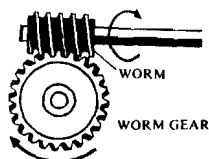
The worm gearing has a short revolving screw (the worm) whose teeth move into the special teeth of a helical gear (the worm gear).
